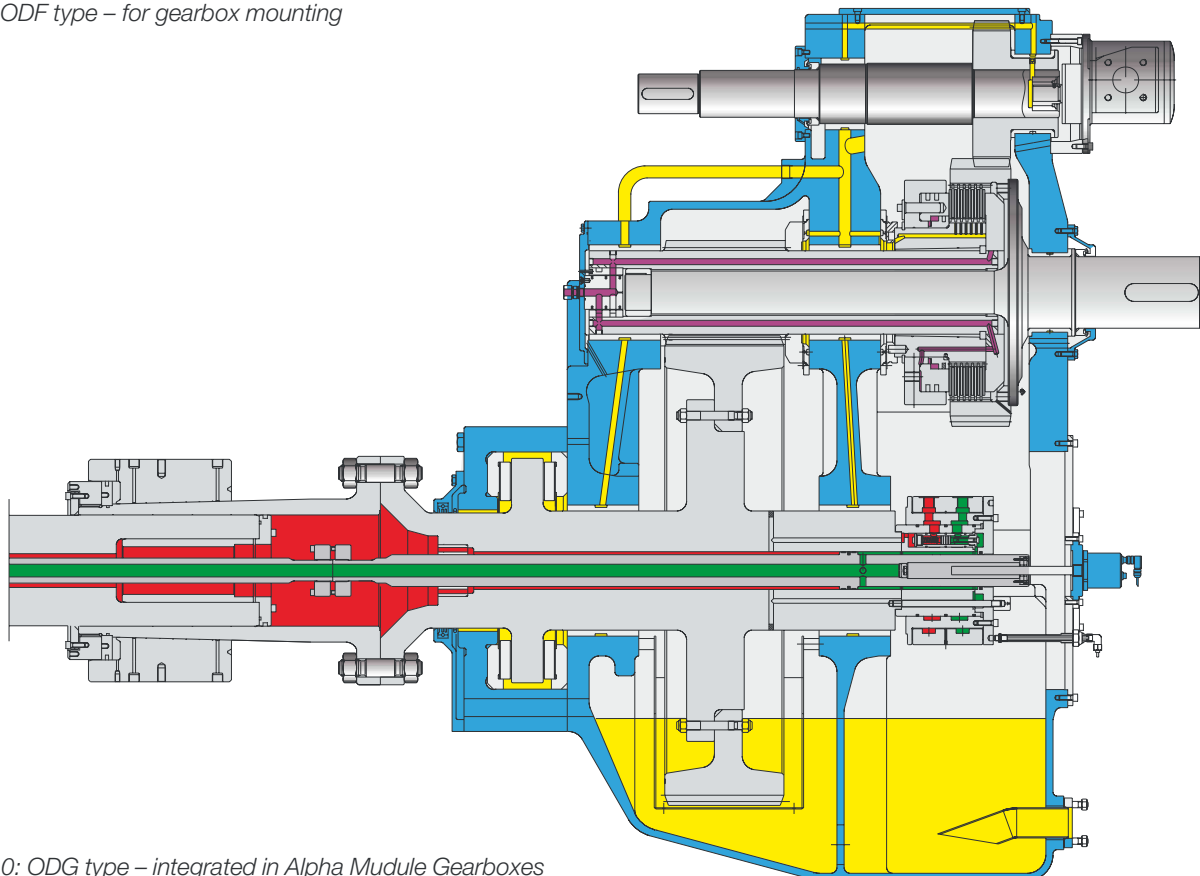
ODG type – integrated in Alpha Module Gearboxes
